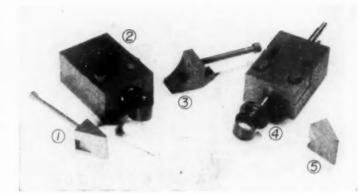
Striker Noses and Holding Devices for Testing Welded Assemblies in Riehle Impact Machine
